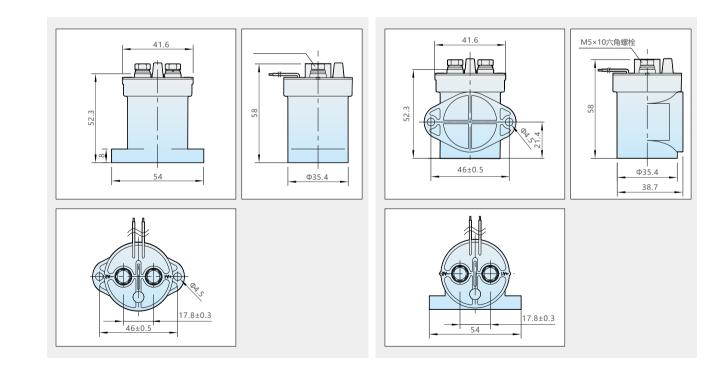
Outline drawings and installation dimension diagrams ofNCZ2-100P/E/ H
